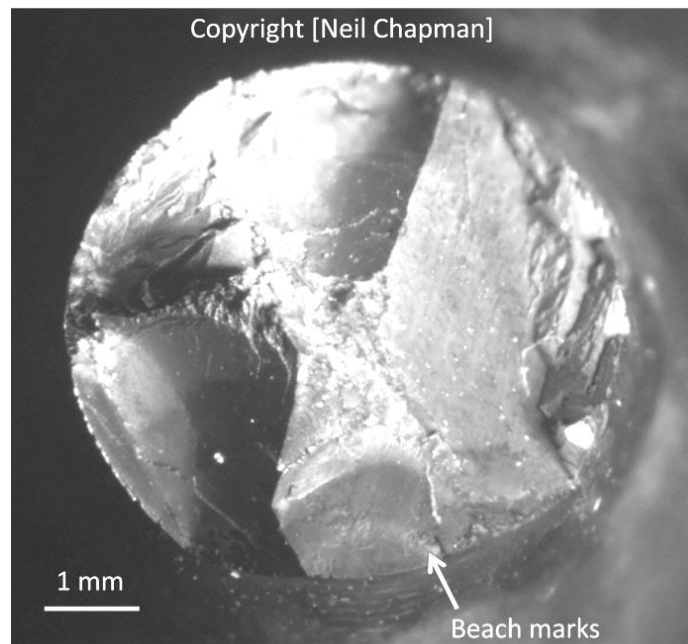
Low powered optical microscope image of beach marks observed on the initial flat perpendicular crack from the corrosion fatigue test using the 10-1-1-1 s waveform and non-precorroded test specimen
